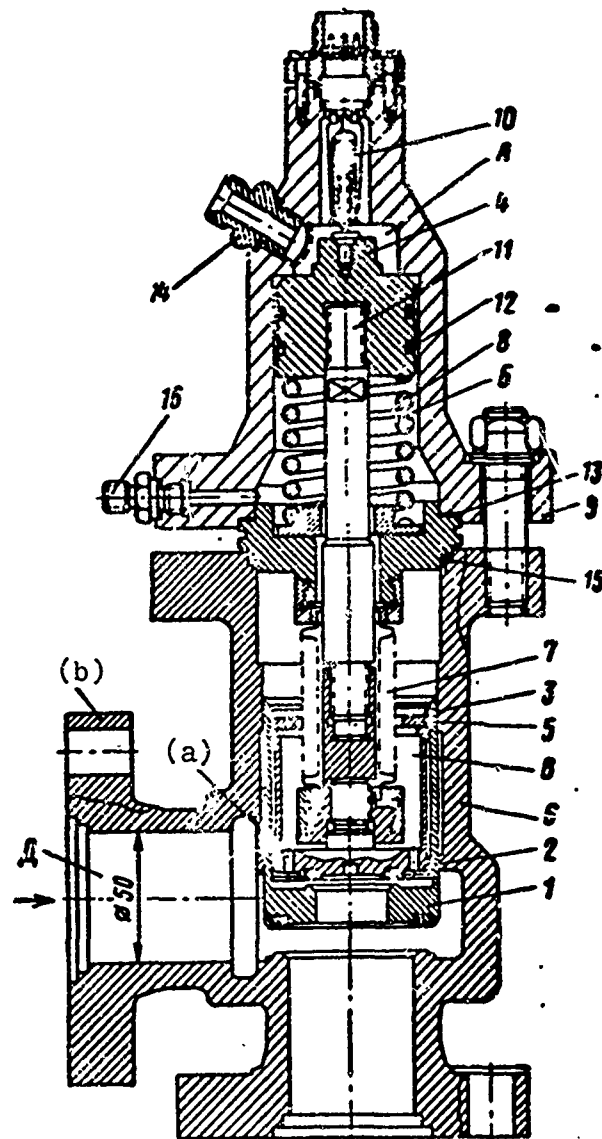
A normally open balanced valve: A - controlling cavity; B - auxiliary controlling cavity; B - propellant cavity; A - inlet pipe; 1 - main valve; 2 - small valve; 3 - stop ring; 4 - piston; 5 - washer; 6 - housing; 7 - bellows; 8 - spring; 9 - cover; 10 - signal indicator; 11 - rod; 12 - seal ring; 13, 15 - gaskets; 14, 16 - connector tubes; a - bore in valve 2; b - inlet flange of housing 6.
